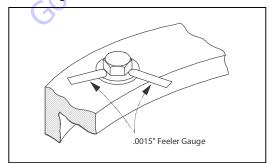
Swing Bearing Bolt Feeler Gauge Check
